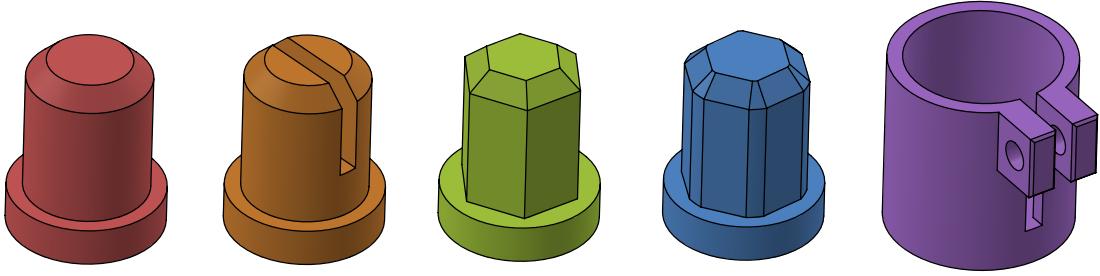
Render of the plug concepts considered for the attachment of aluminium shafts onto joints and pivots
